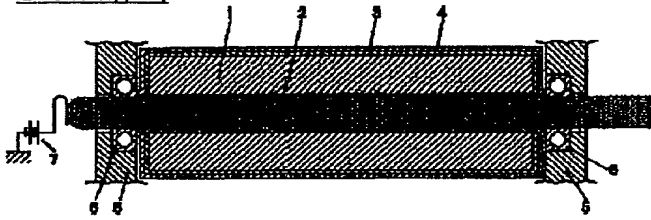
It is drawing showing the production process of vacuum evaporationo plating.
